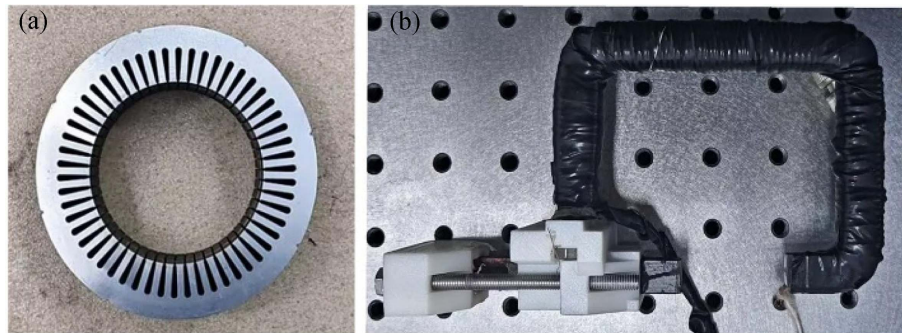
(Color online) Test specimen and single C-type yoke. (a) Picture of stator core stamped and welded from 20SW1200 non-oriented electrical steel. (b) Measurement equipment diagram.
